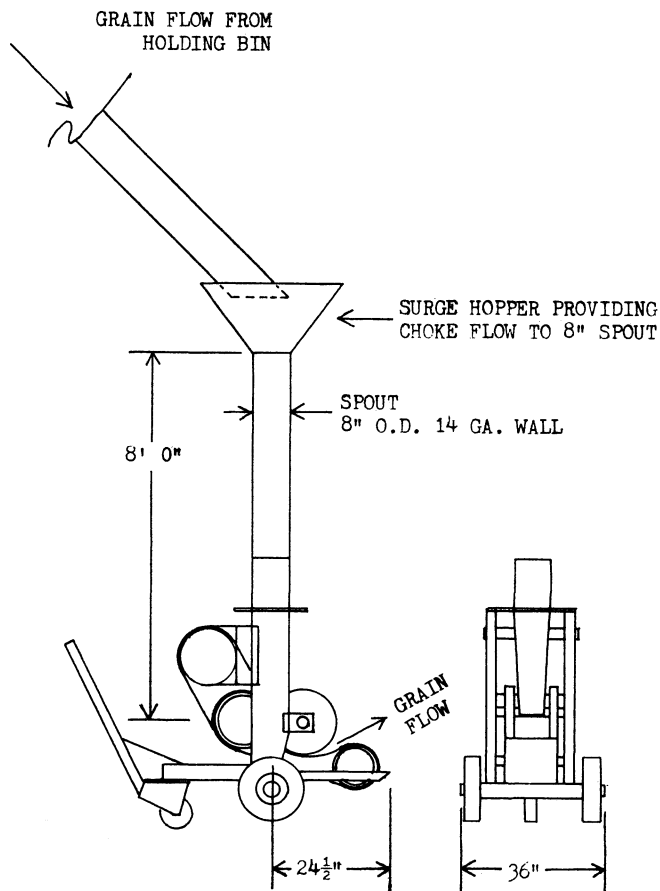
Grain thrower used for breakage tests (Stephan-Adamson 16-in. swivel piler)
